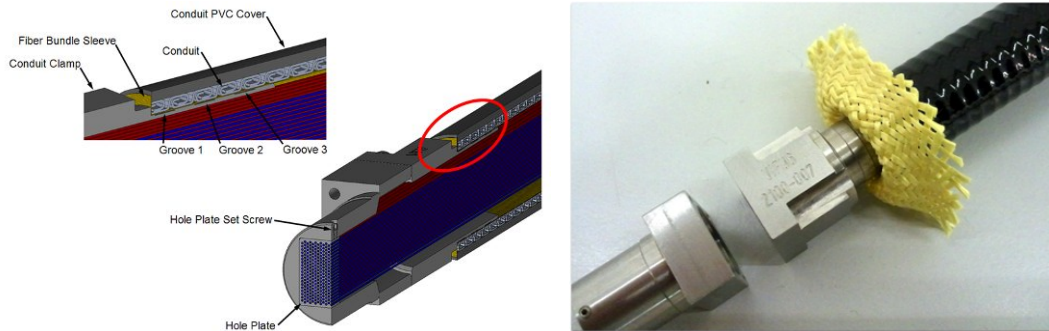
Left: cut-view of the input head and its connection to the conduit. Right: image of the conduit connector to the IFU head assembly, with part of the inner Kevlar sleeve extending outside.
